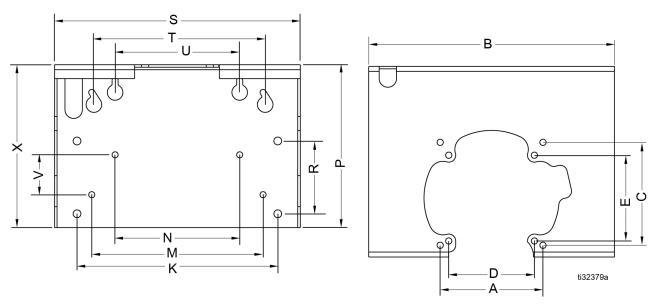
Wall Mounting Hole Dimensions for King PC Spray Packages and Pumps
